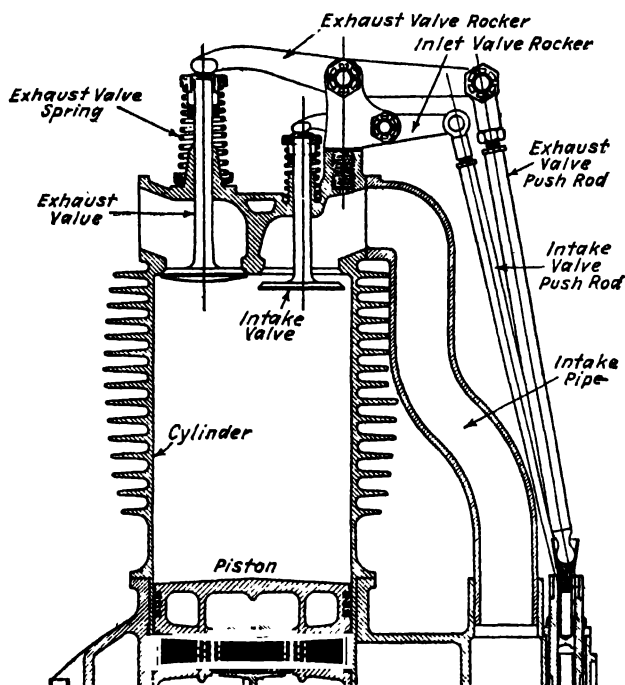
Sectional View of Cylinder Showing Valves and Actuating Rocker Arms of Anzani Engine.
